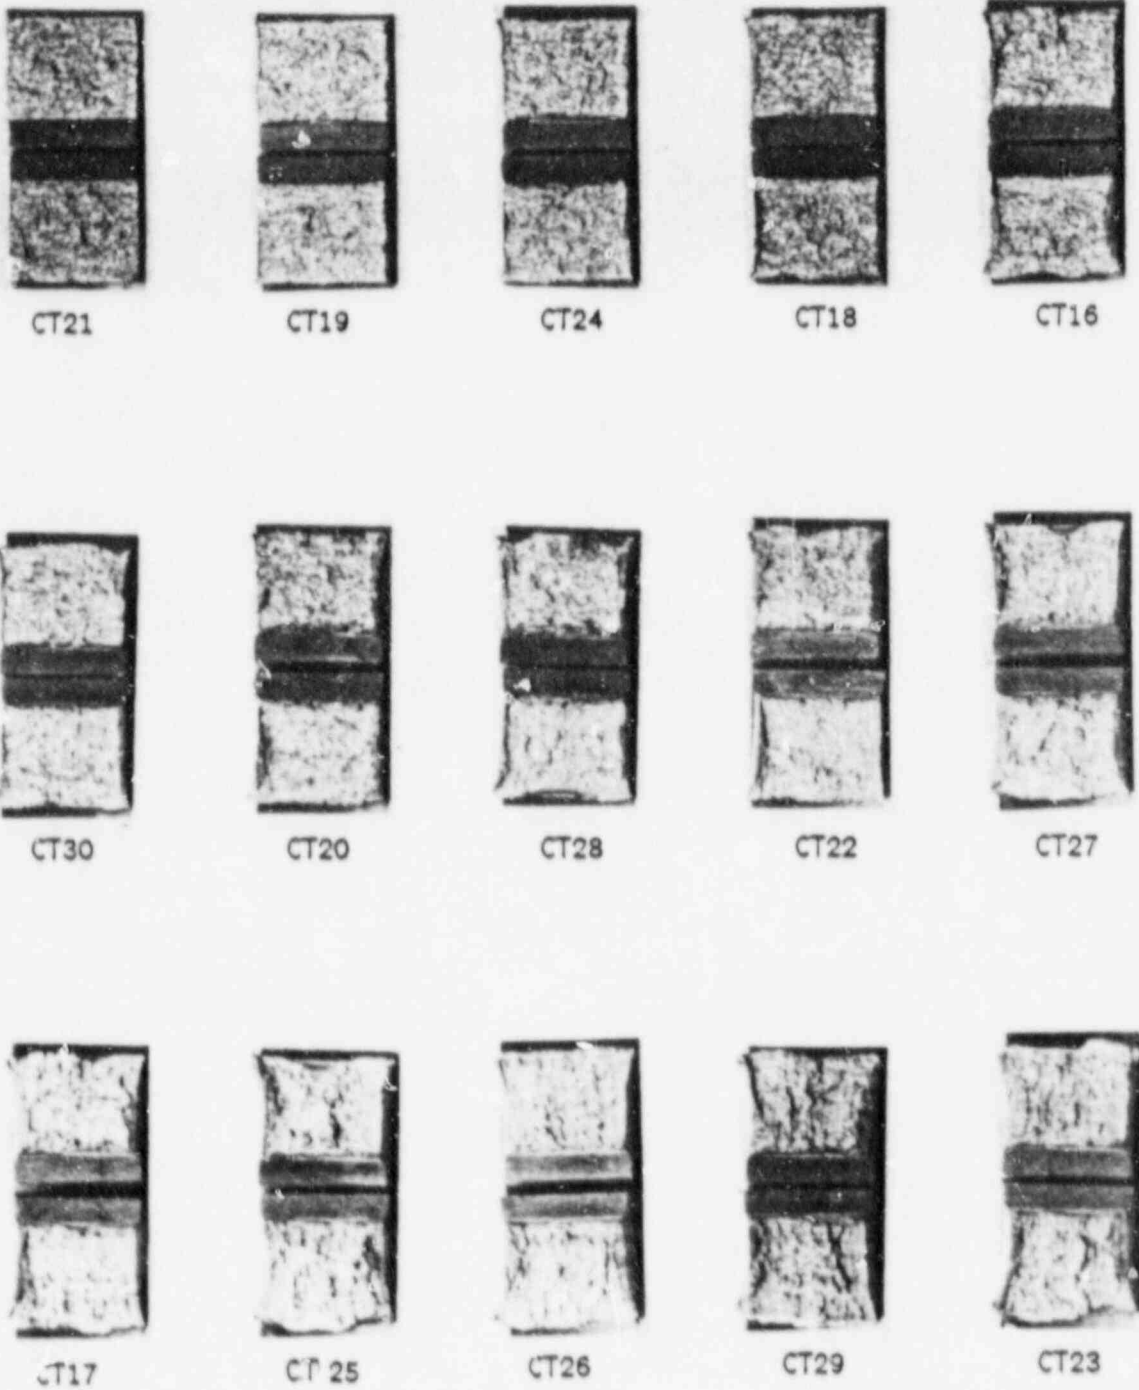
Charpy impact specimen fracture surfaces for V. C. Summer Unit 1 reactor vessel shell plate A9154-1 (transverse orientation)
